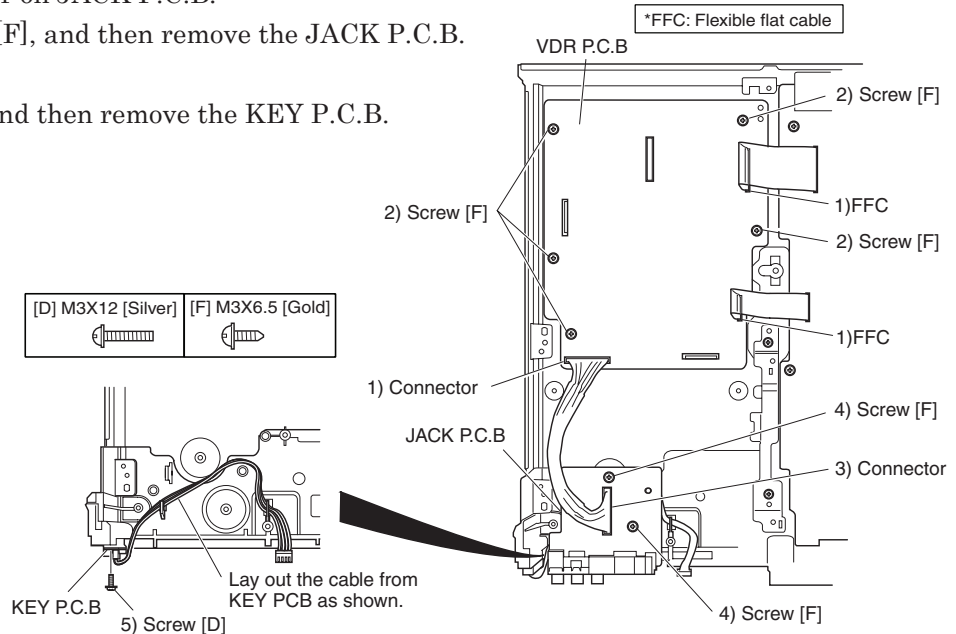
VDR P.C.B, JACK P.C.B, KEY P.C.B
